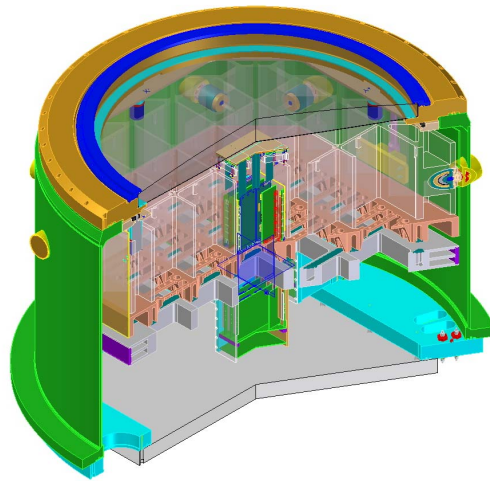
The cryostat housing holds the grid assembly. The raft towers are mounted into the square slots of the grid.
